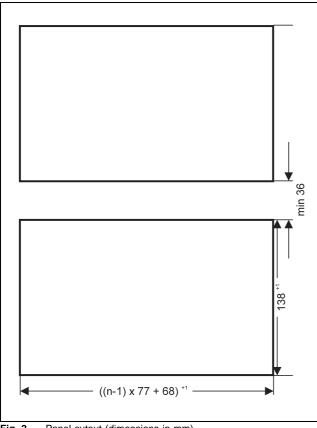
Panel cutout (dimensions in mm) Z-19165
